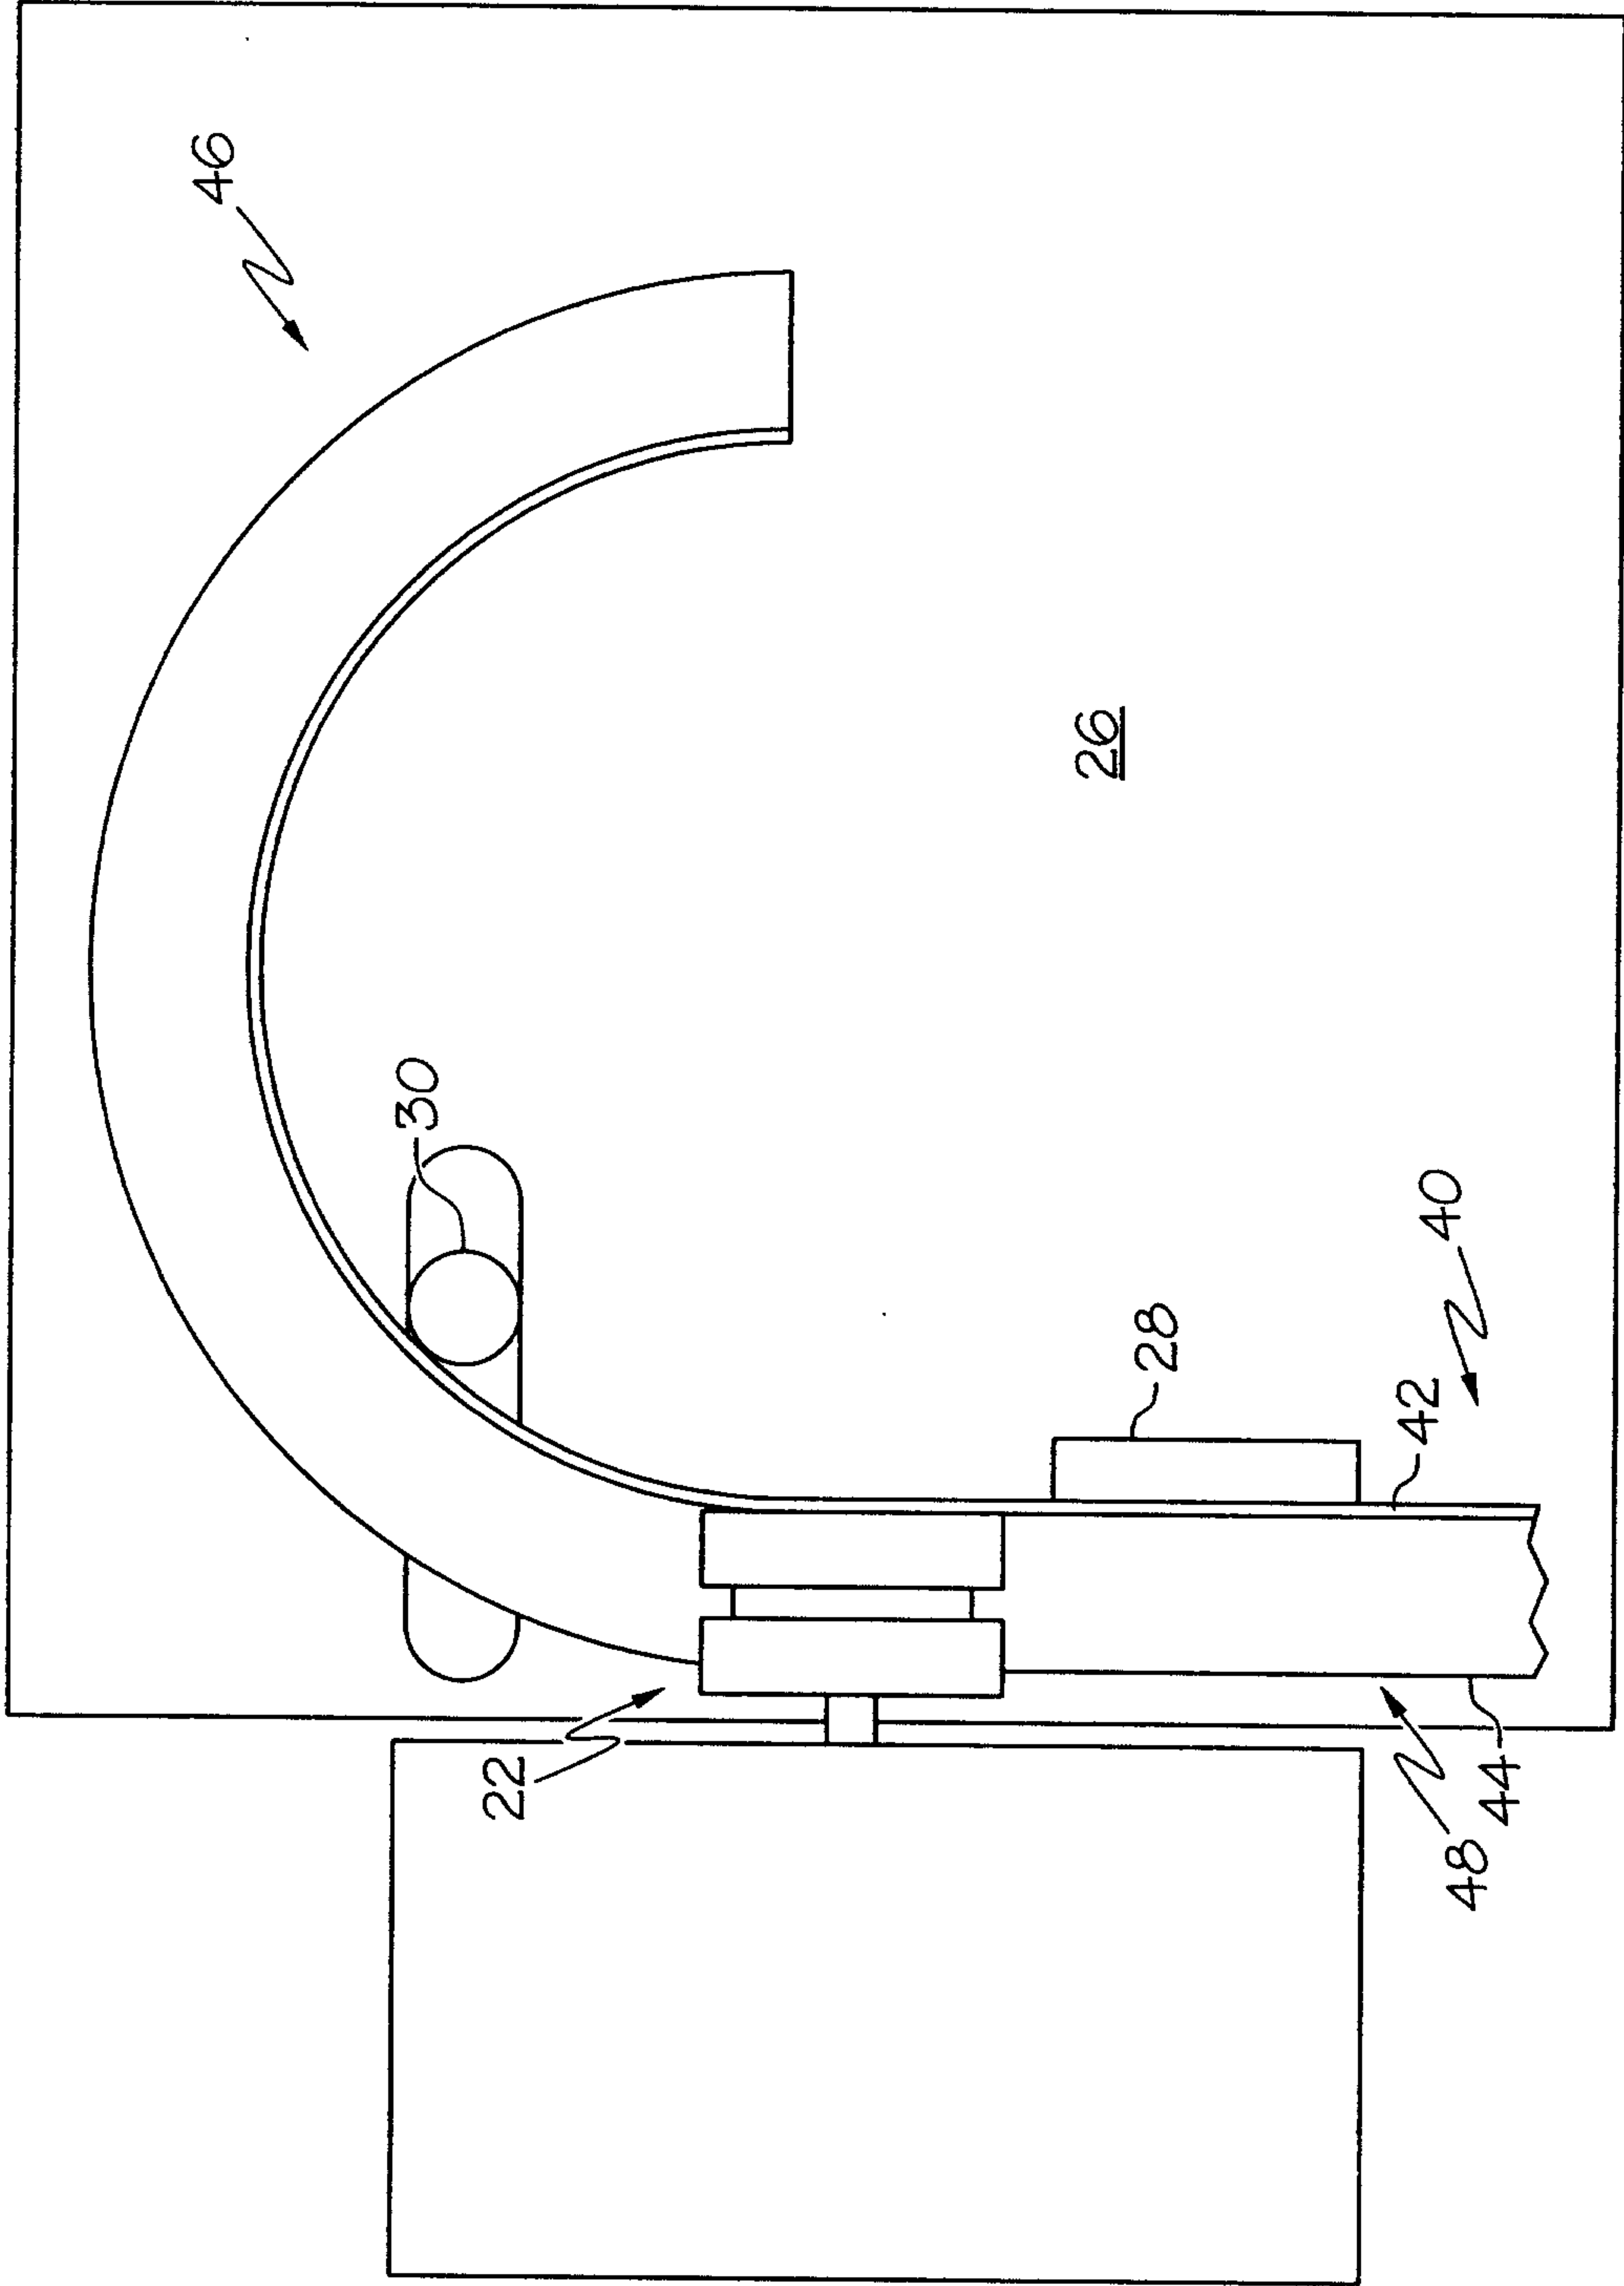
B is a sectional view of the device along line 7A-7A wherein the J-shaped flange portion has been removed for clarity;
